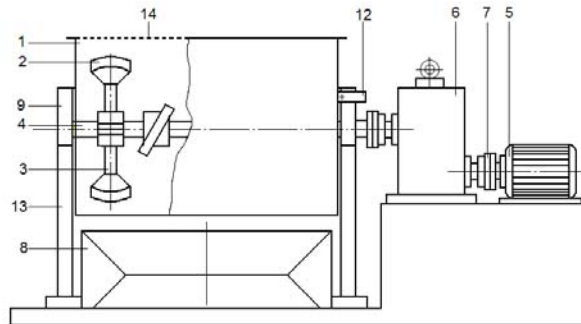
Blade mixer: 1 – tank; 2 – blades; 3 – blade supports; 4 – shaft; 5 – electric motor; 6 – reducing gear; 7 – coupling; 8 – flute; 9 – bearing; 12 – stopper; 13 – frame; 14 – protection grate.
